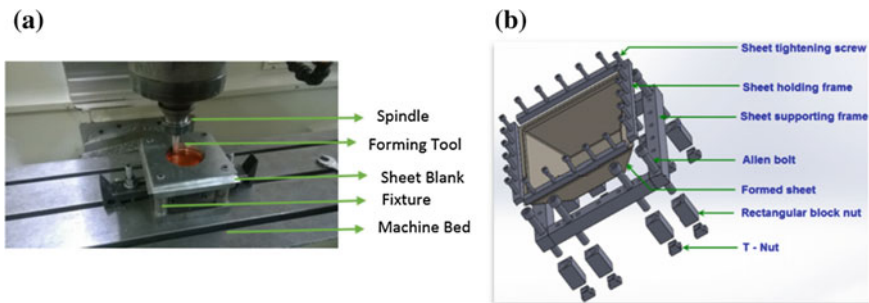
Fixture for ISF. a Experimental setup and b CAD model
